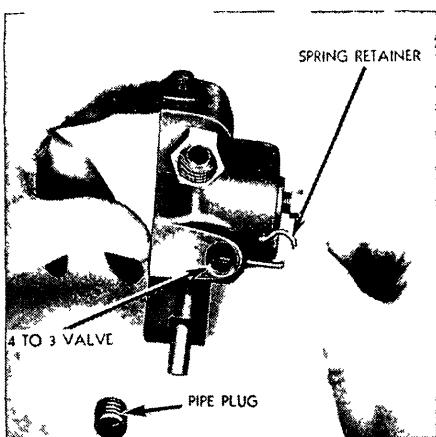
Remove pipe plug and spring retainer holding 4 to 3 valve in place
